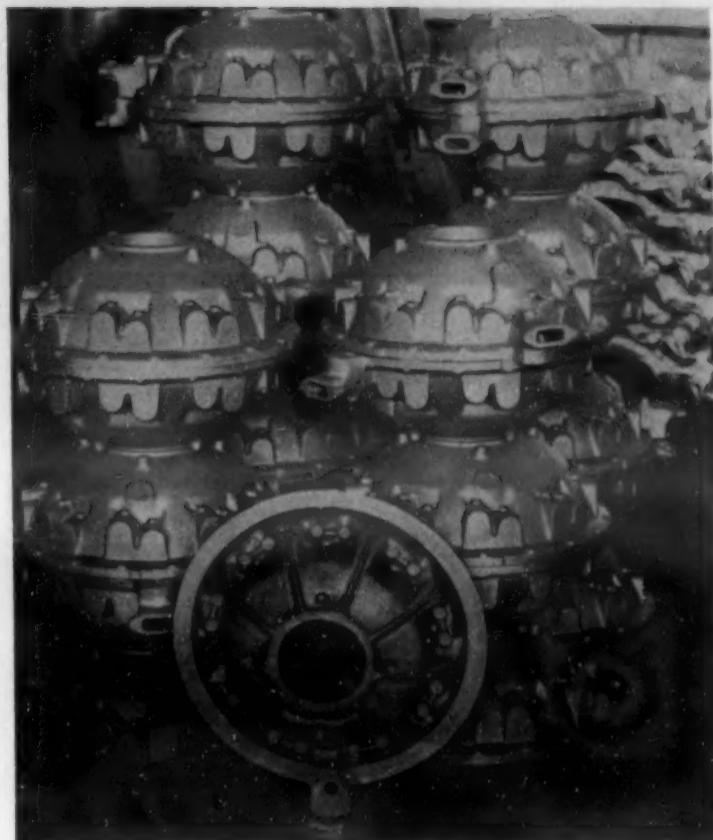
Sand casting for the nose piece for the Pratt & Whitney radial engine.
